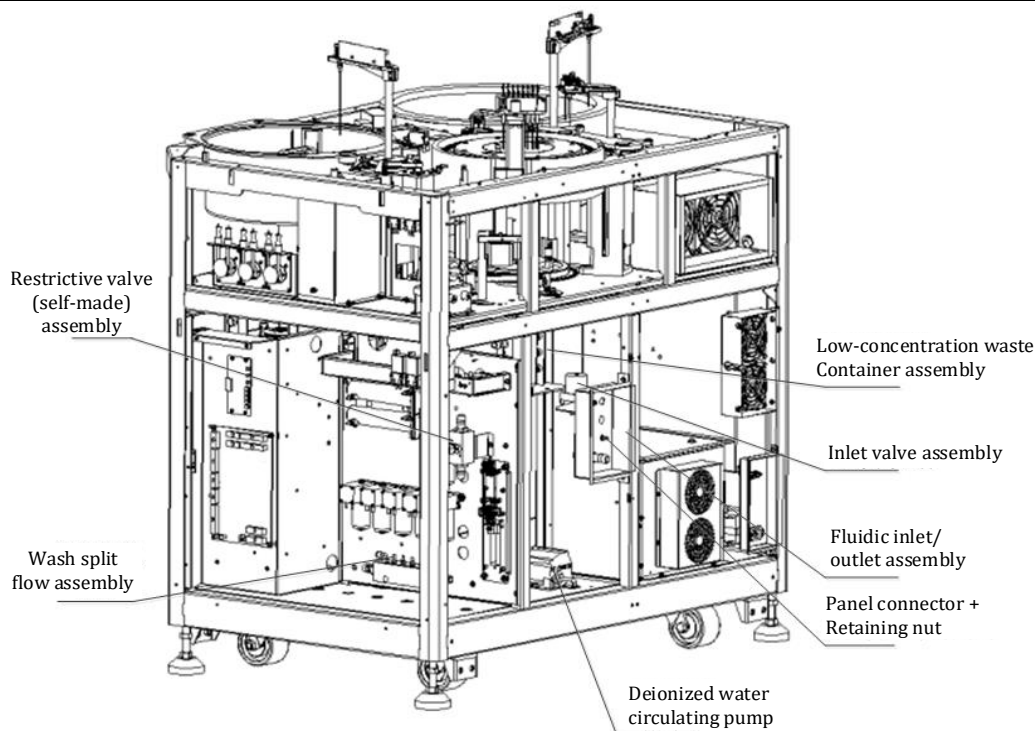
Assembly drawing of whole unit -- Water supply/drainage module-right rear view
